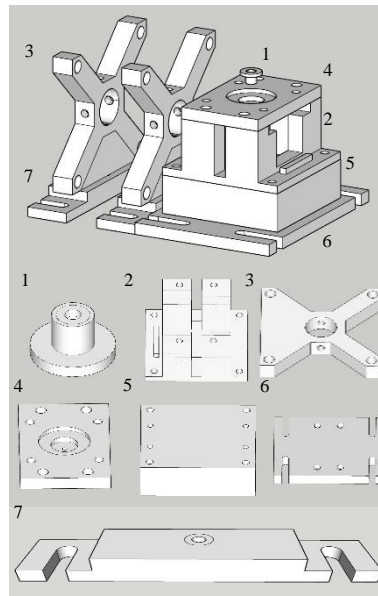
Schematics of 3D printable components for the OPT system. The image above shows when printable components are placed together. Note that the position of each component can be fixed by the user using screws, glue or tape.
